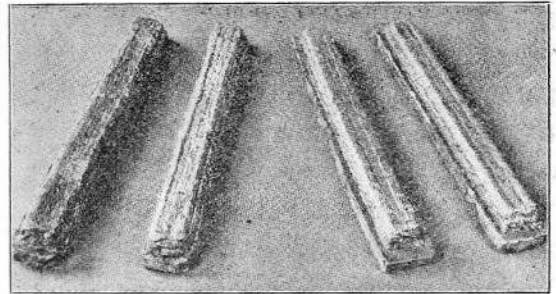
Pads of Solid Weld Metal prior to Machining for Test.
